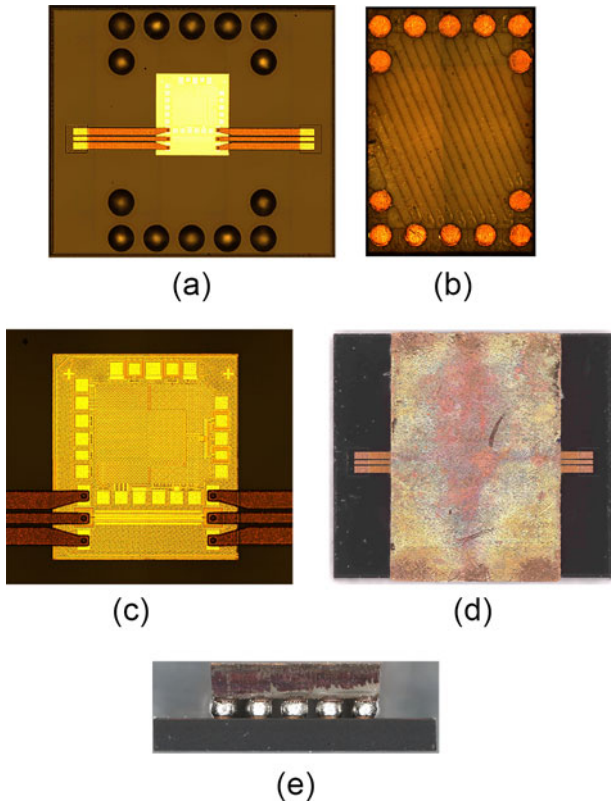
Chip-to-package interconnect: (a) eWLB package; (b) PCB; (c) transition and MMIC details; (d) top view of assembled package; and (e) side view of assembled package.
